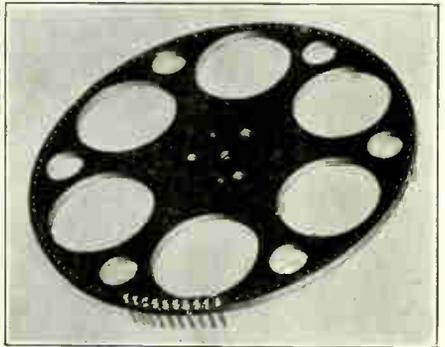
Ten steel pins inserted in a timing disc for a seam welding control to provide a weld period of five cycles.
